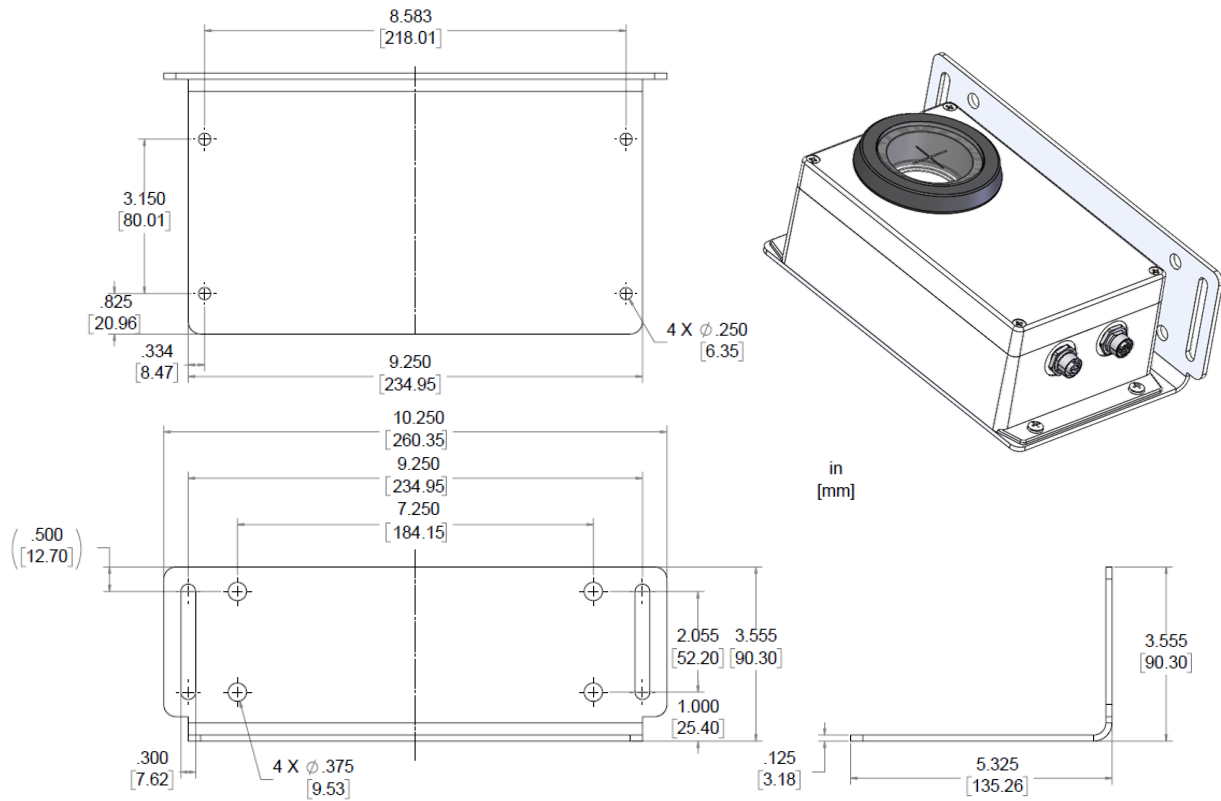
Optional right-angle mounting bracket 610451 (sold separately)
